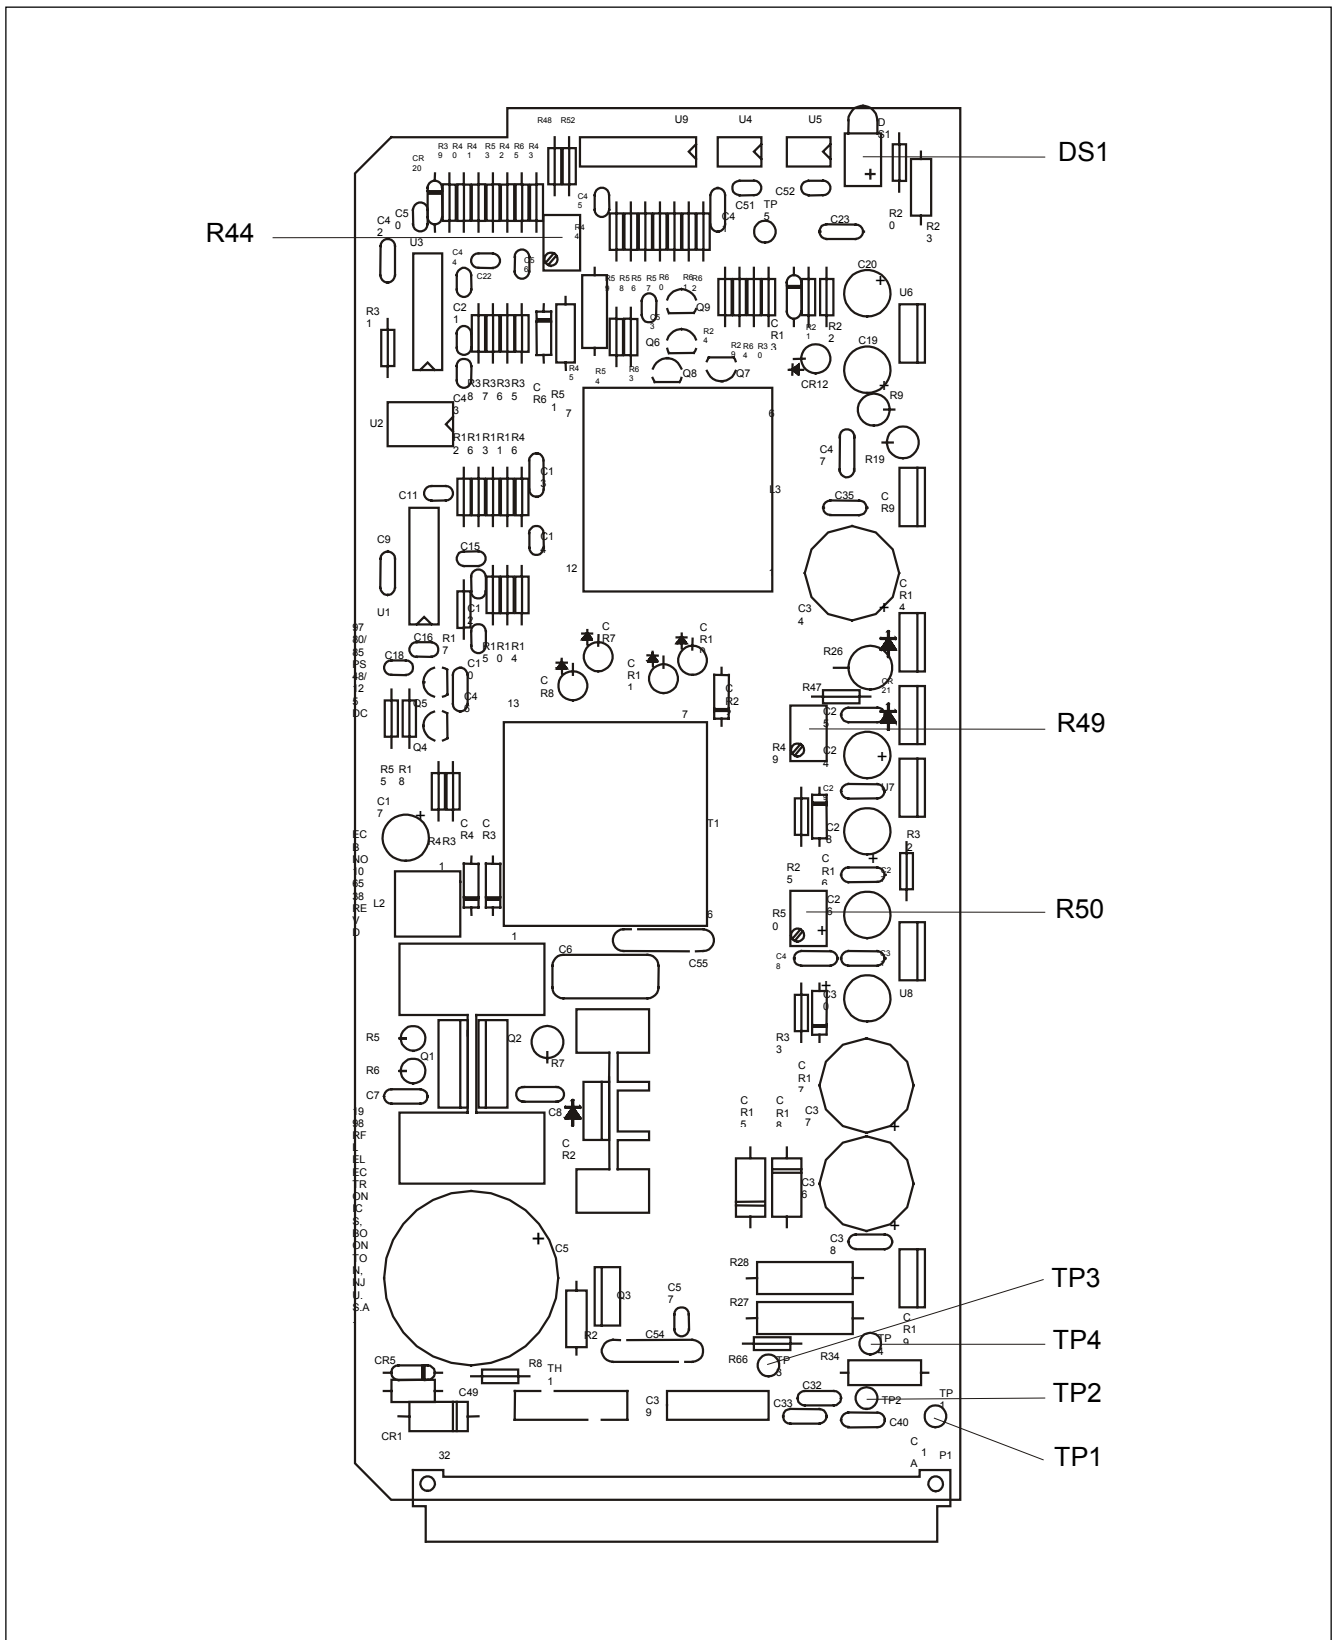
Controls and indicators, and component locator drawing, for RFL 9785 power supply module (Assembly No. 106535-1)
